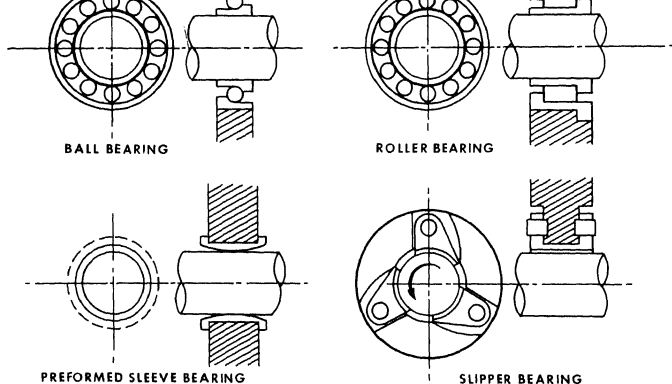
Types of main bearings used for gas turbine rotor support.
